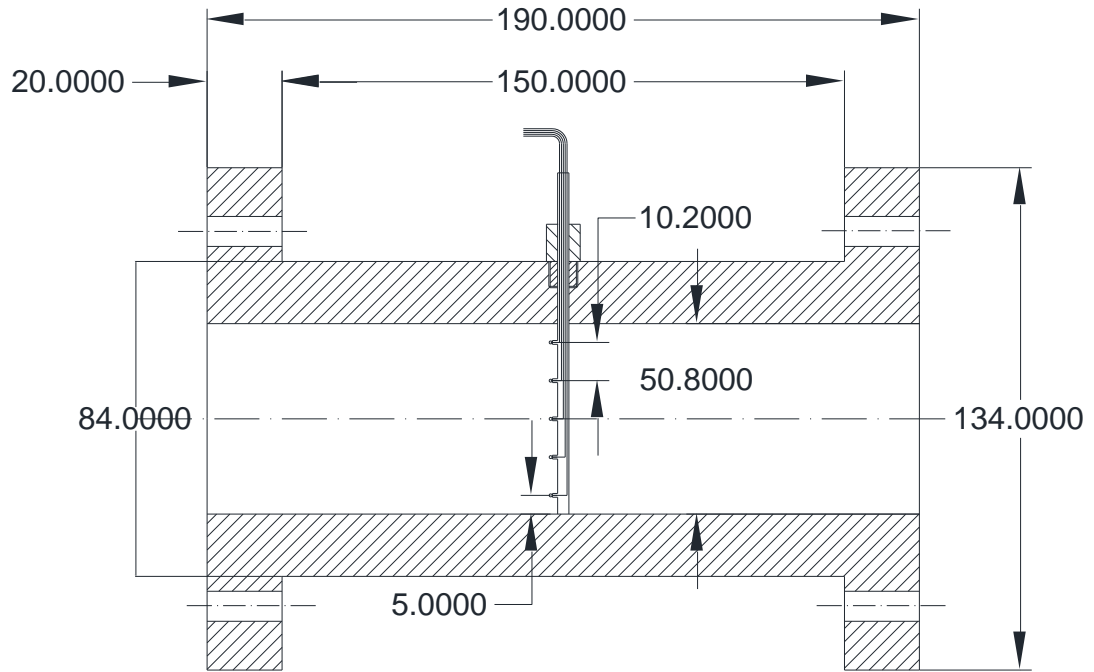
Detailed drawing of a polyethylene tube and the inserted temperature probe.
